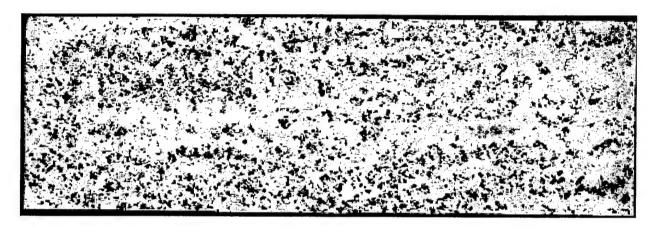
T6 Corrosion Specimen After Chemical Cleaning.
